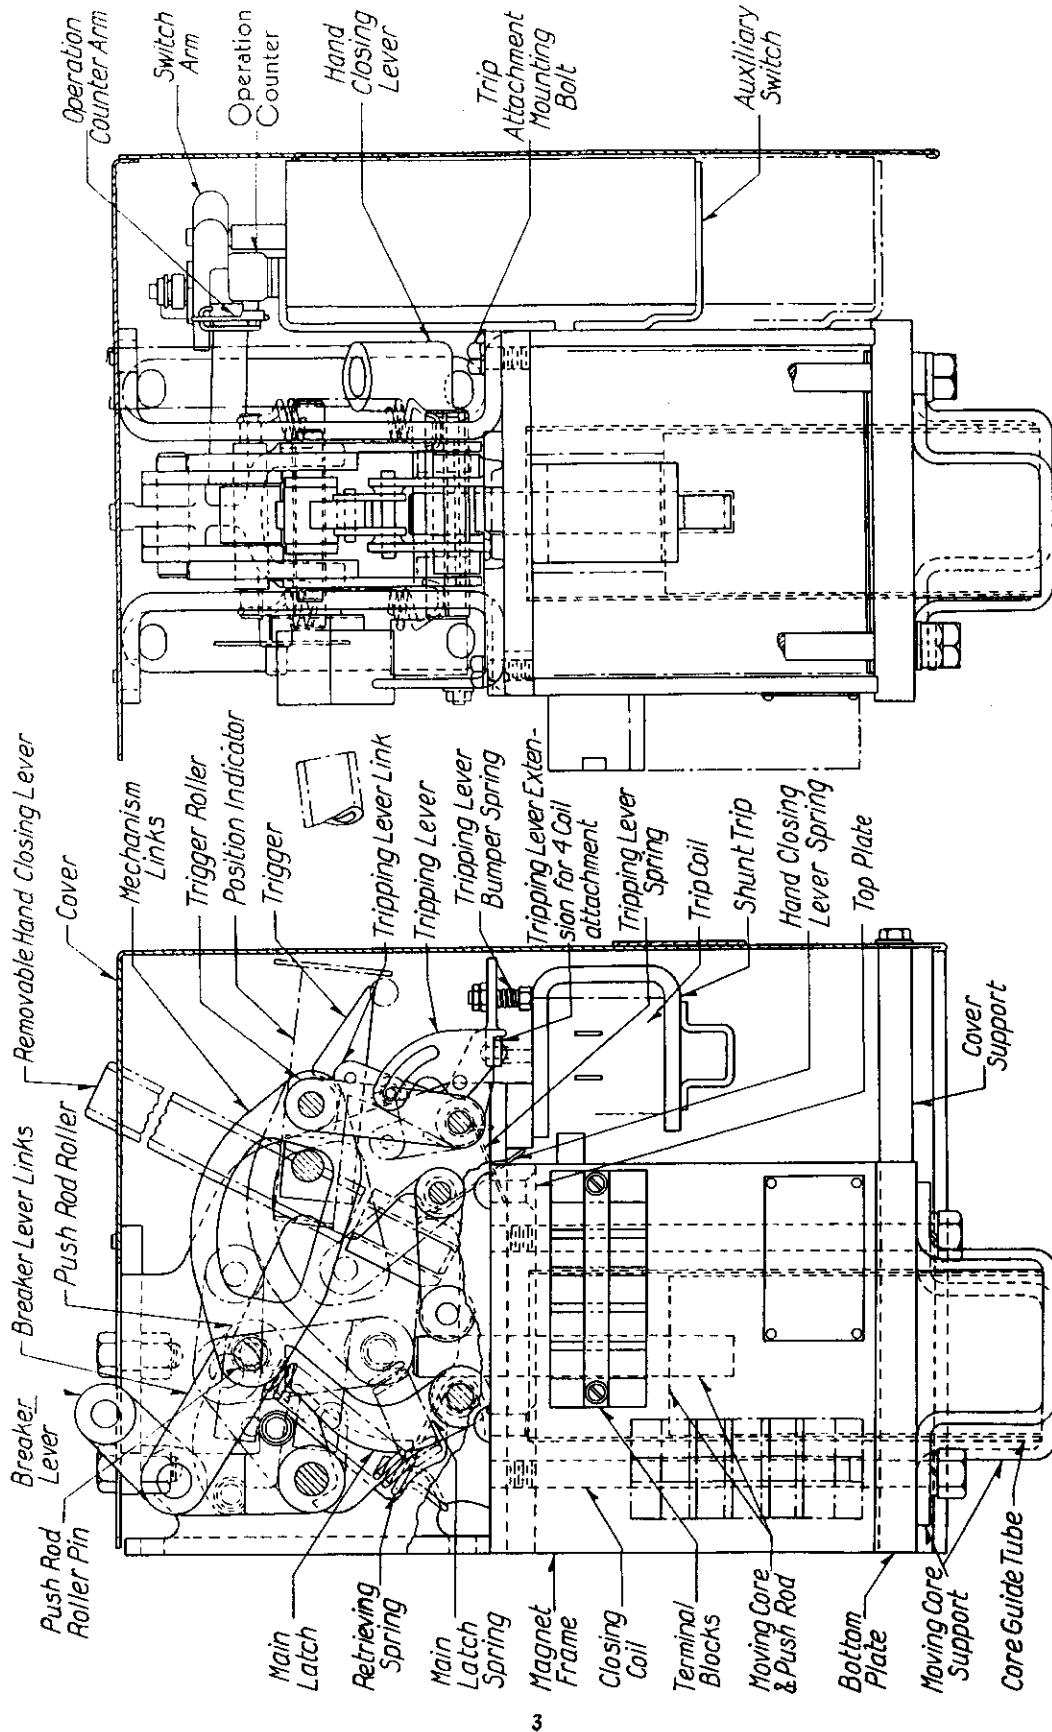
CIRCUIT BREAKER—OIL-TYPE "SAF-2" MECHANISM ASSEMBLY
